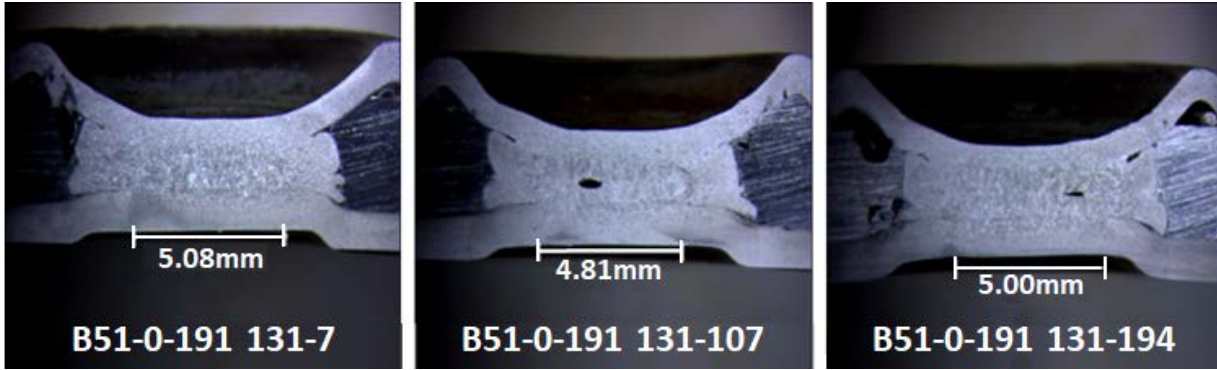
F.3. Results from the EL Trial – 1.2 mm 980MPa to 3.0 mm Aural 2 (6 mm Pilot) – through the Dow 5055-C with R4-6GA-V rivet (left to right): Weld #7 Section, Weld #107 Section, and Weld #194 Section. Source: Arconic.
